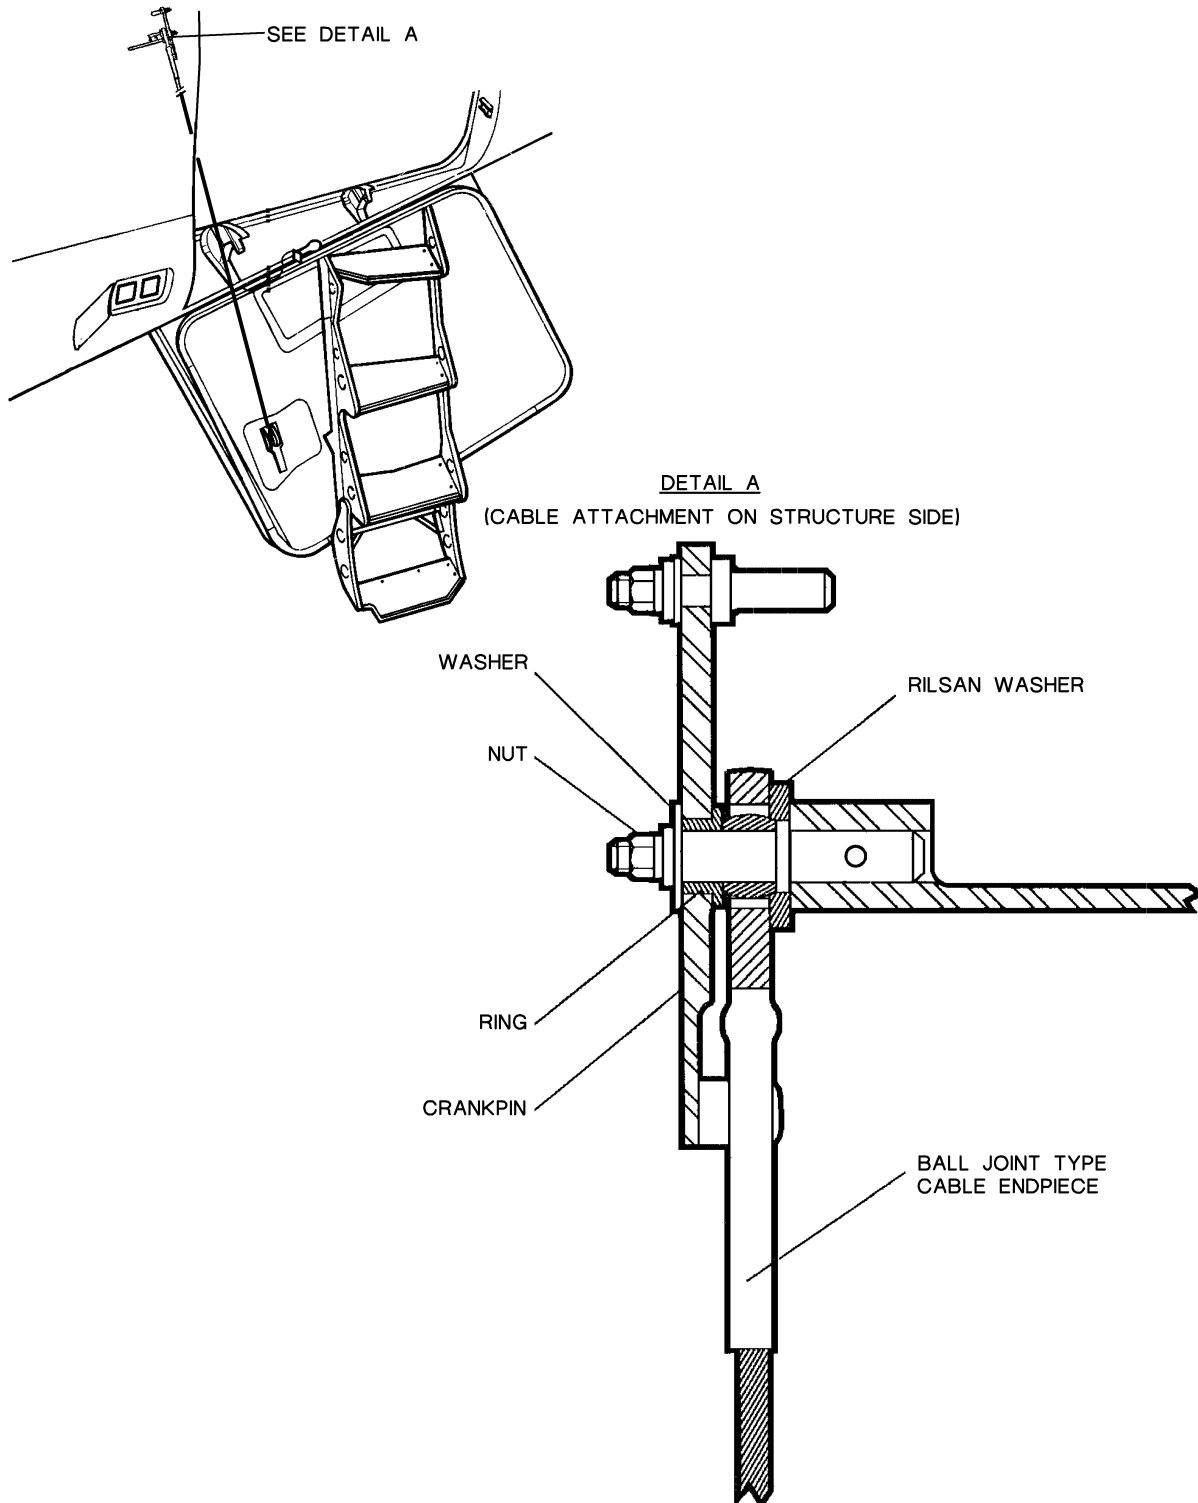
Attachment of Reducing Gear Motor Cable on Structure Side
